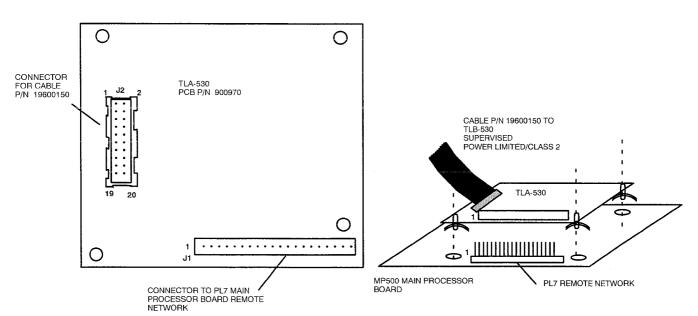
TLA-530 TFXnet Adaptor Board Installation and Wiring.
